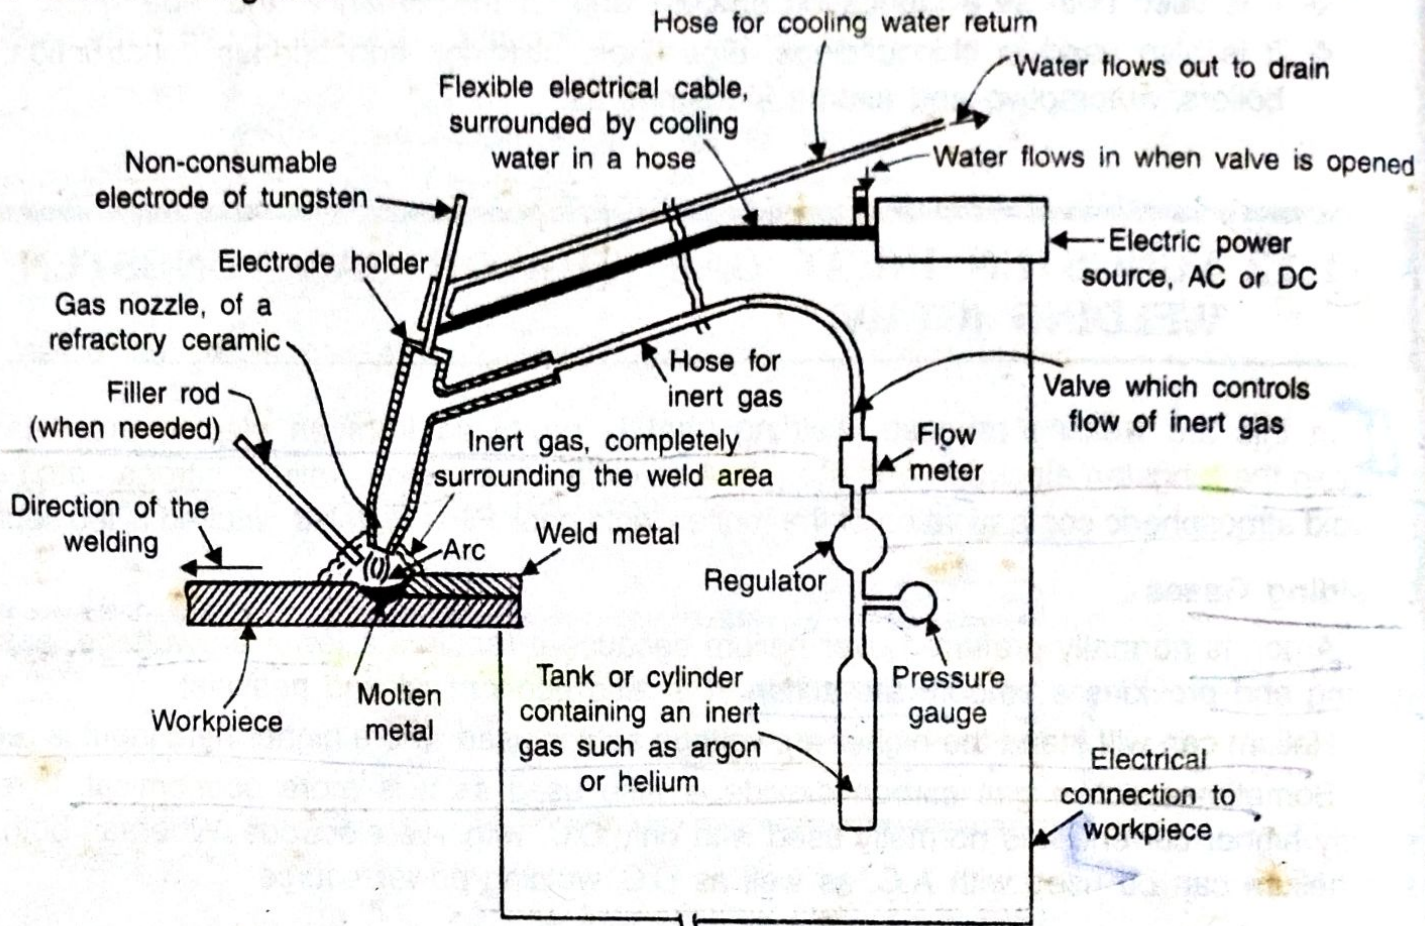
(a). Principle of Tungsten Inert Gas (TIG) Welding.
